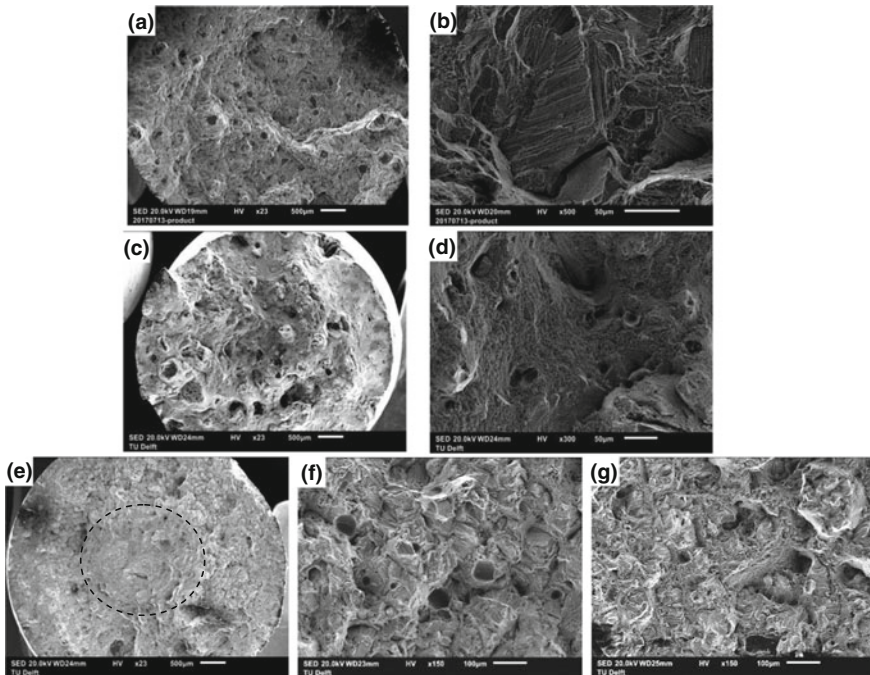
Fracture surface of heat treated SLM produced Inconel 718 after creep testing at 650 °C and 690 MPa: a and b 250 W; c and d 950 W; e and f Functionally graded with core 950 W
